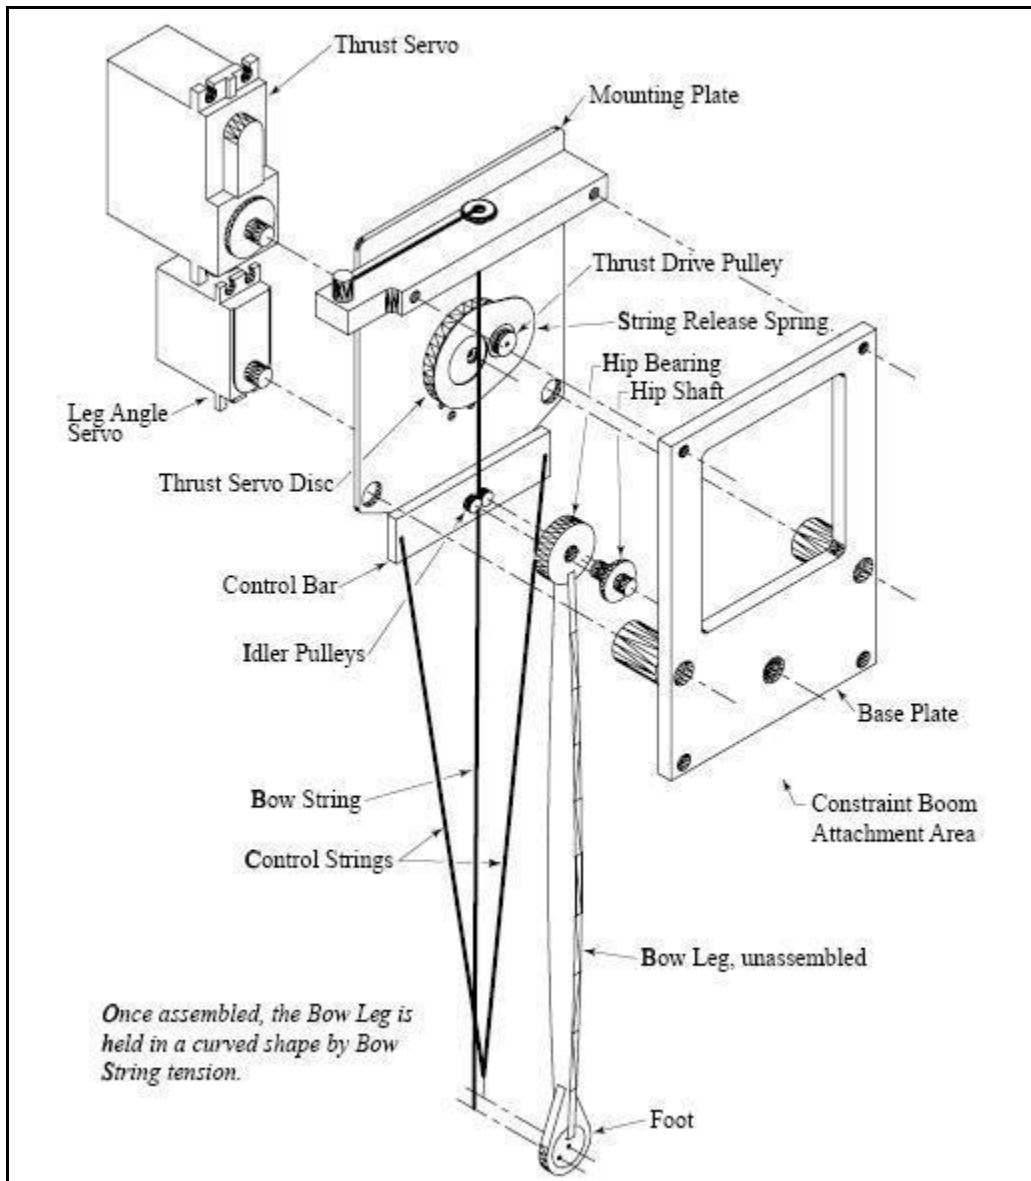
Exploded view of the Bow Leg Hopper [6]
